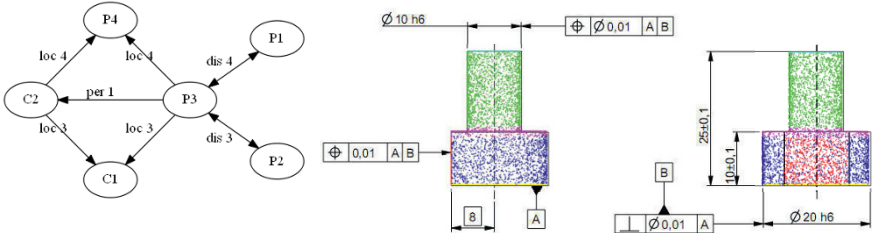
part tolerancing with two dimensional tolerances to interpret in the SPG
